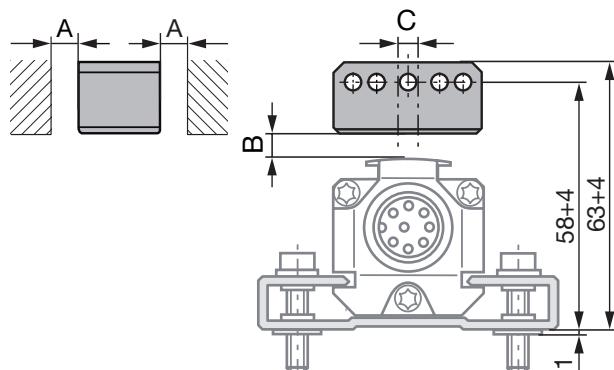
Dimensions and distances with BTL6-A-3801-2 magnet
